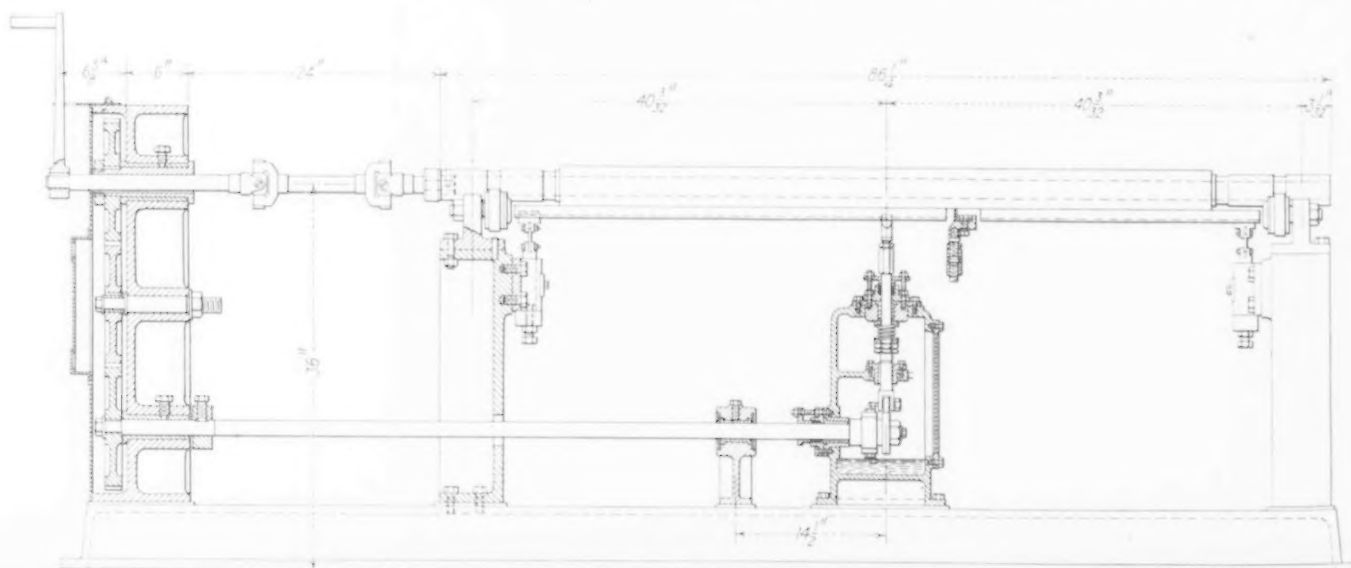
General details of machine for producing deflected cores. There is no change from a regular core machine except in the knife which forms the crooked core by means of a special mechanism.
